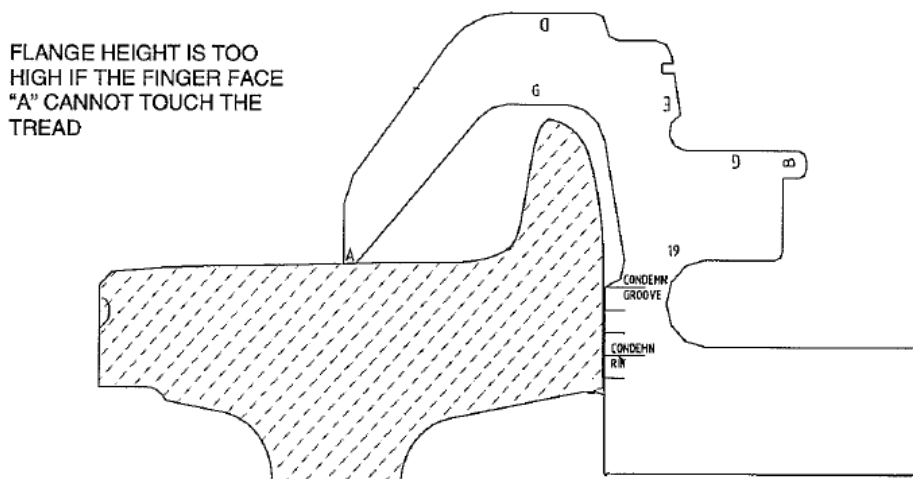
Wheel Condemn Gauge No. 300008 - high flange indication
